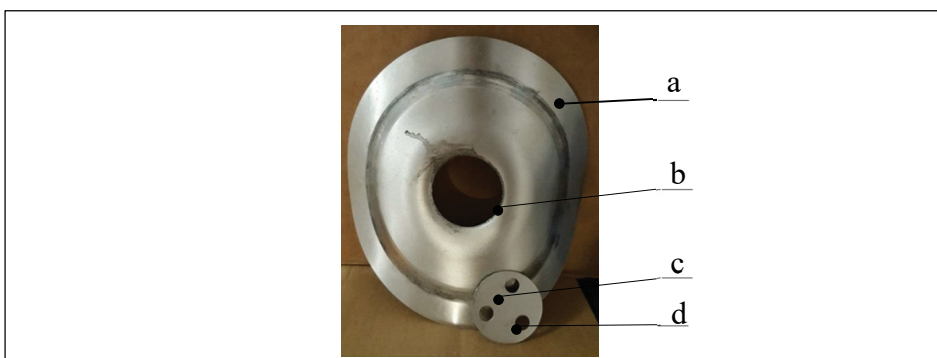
Circumferential crack; (a) the plate; (b) circumferential crack line; (c) failure part; (d) tailstock mounted hole
